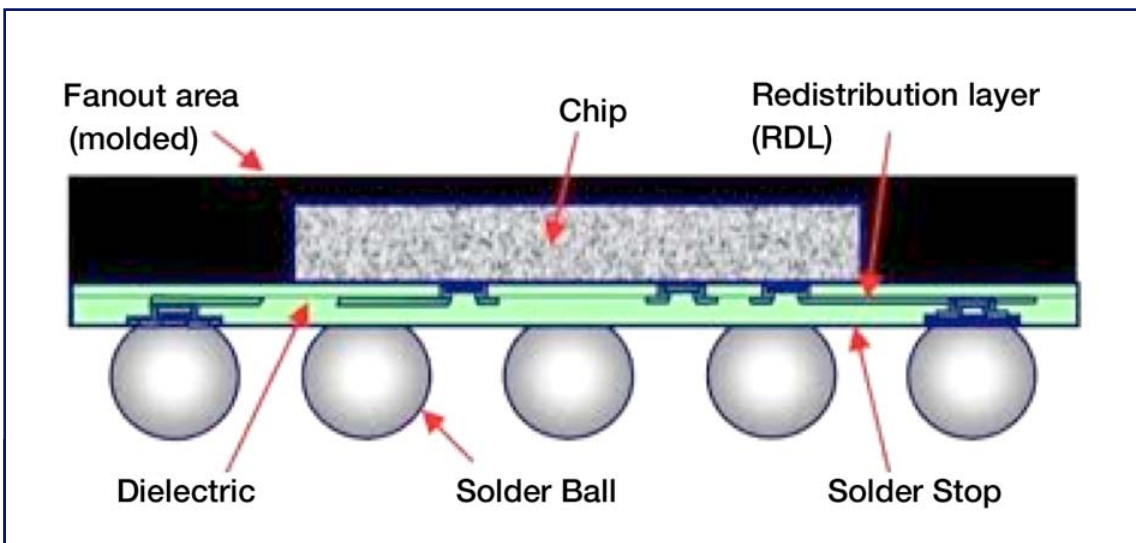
Schematic of Cross-Sectional View of eWLB Packages
